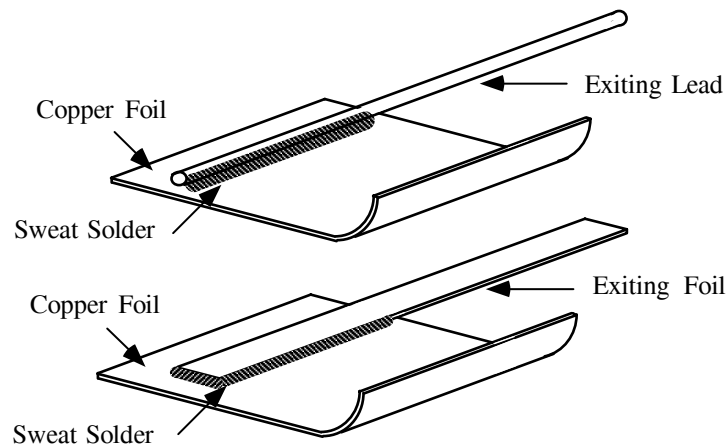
Attaching the Lead to the Copper Foil.
